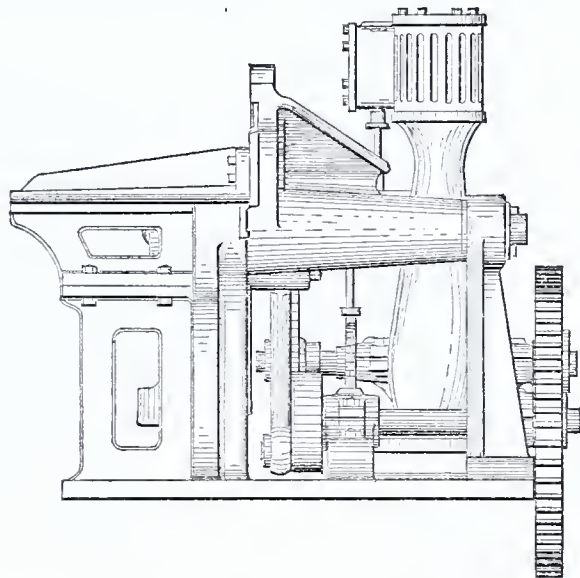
The Leechburg Doubling Shear. End Elevation.
